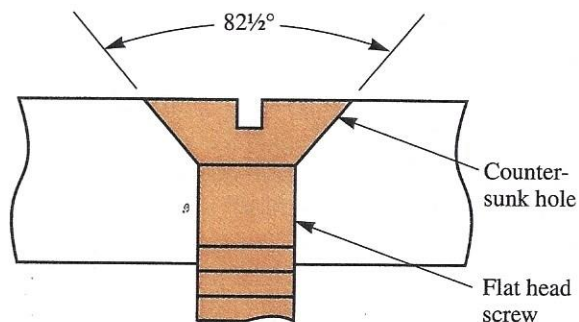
Flat head screw recessed in countersunk hole to be flush with surface.
